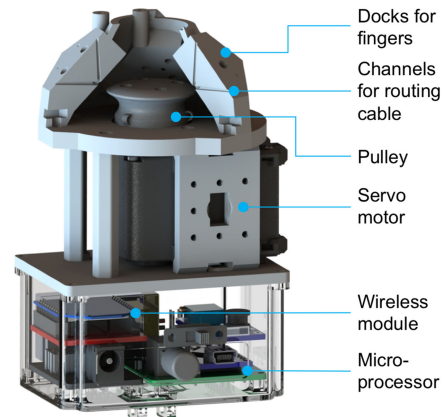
Main chassis contains a microprocessor, battery, power switch, mini USB port, XBee module, servo motor, pulley mechanism, and docks for the fingers and cables.
